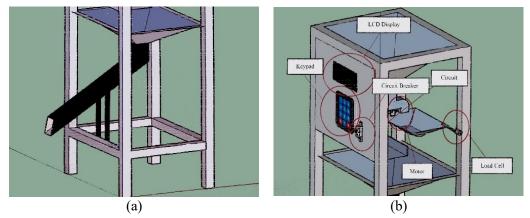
(a) Upper and (b) lower part of the poultry feed dispenser
